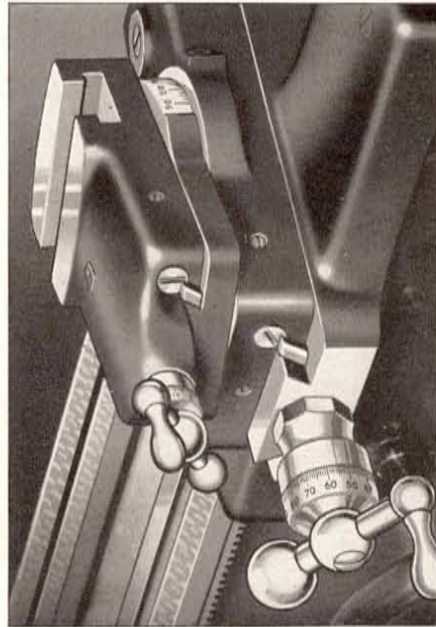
Close-up Showing Adjustable Tapered Gibbs Used on Compound Rest Base and Top Dovetails of 10-inch and Larger South Bend Lathes
